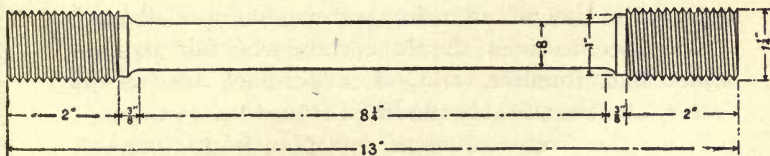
STANDARD TEST BAR FOR CAST IRON.
